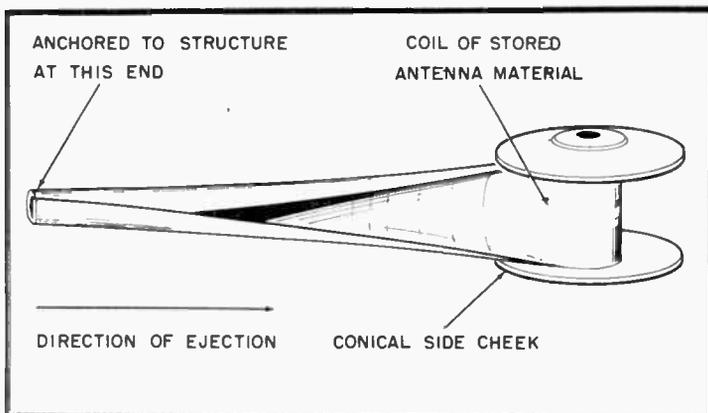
Design employing conical drum cheeks to provide constraint for un-winding strip.
